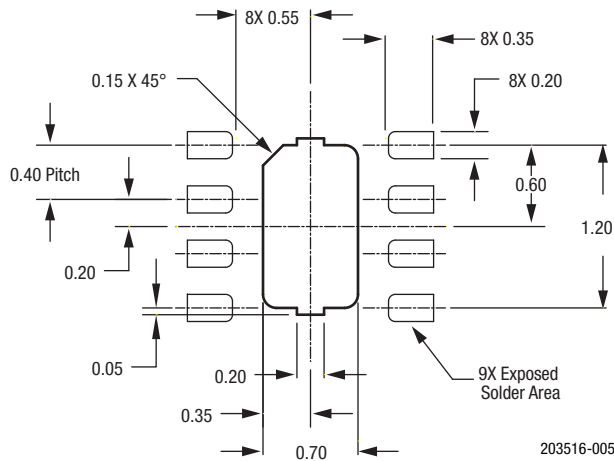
SKY13593-690LF PCB Layout Footprint (Top View)
